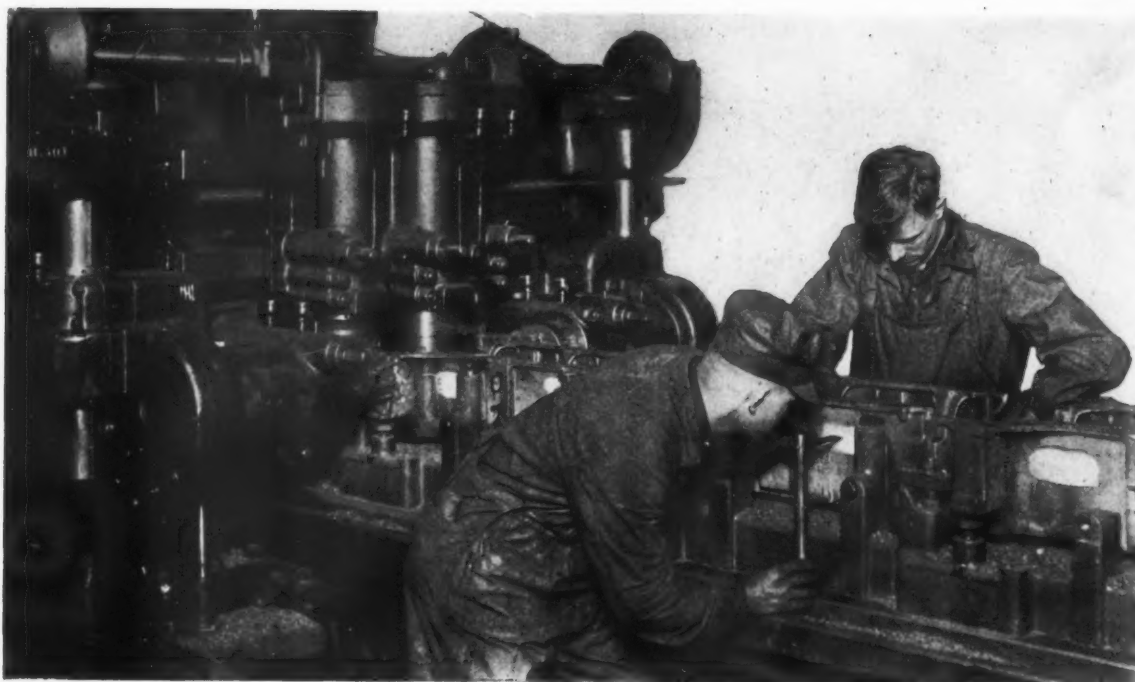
Setting Hupmobile crankcases by locating mark in milling machine for first cut
